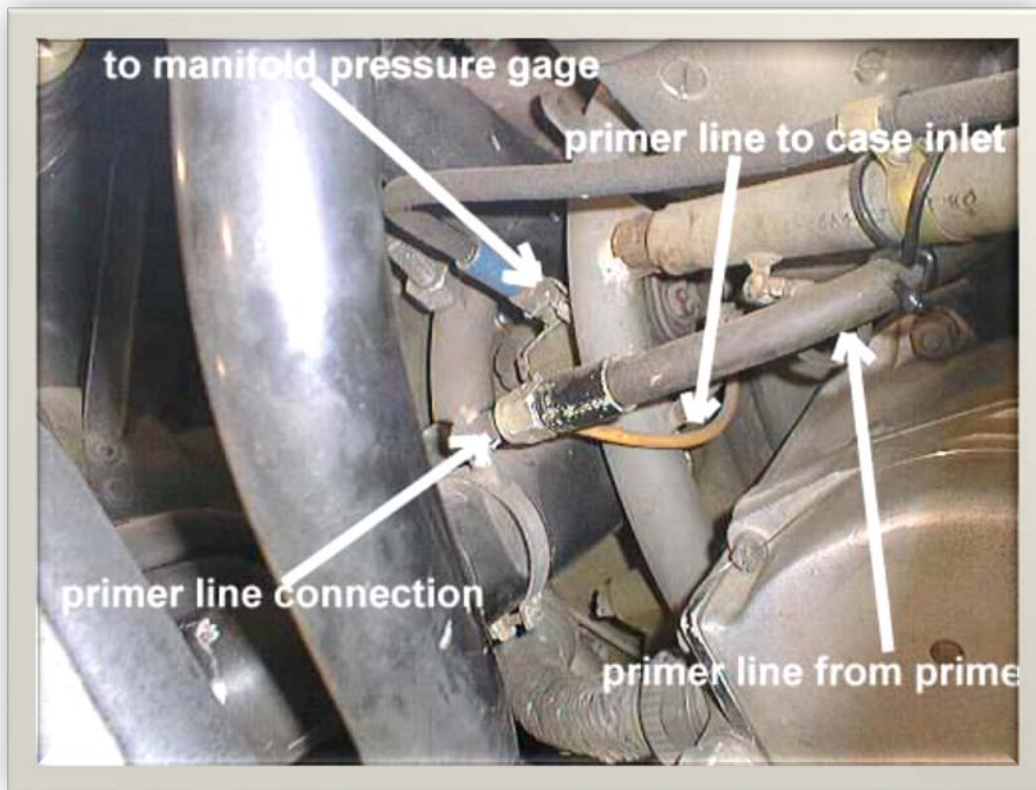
Primer Line Connection (Oil and Manifold Pressure Fittings P/N 14-17-611W)
